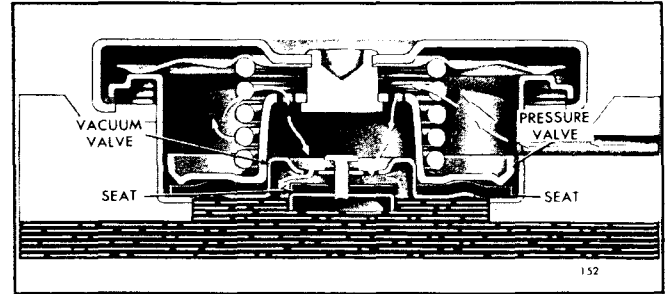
Pressure Control Cap (Vacuum Valve Open)
